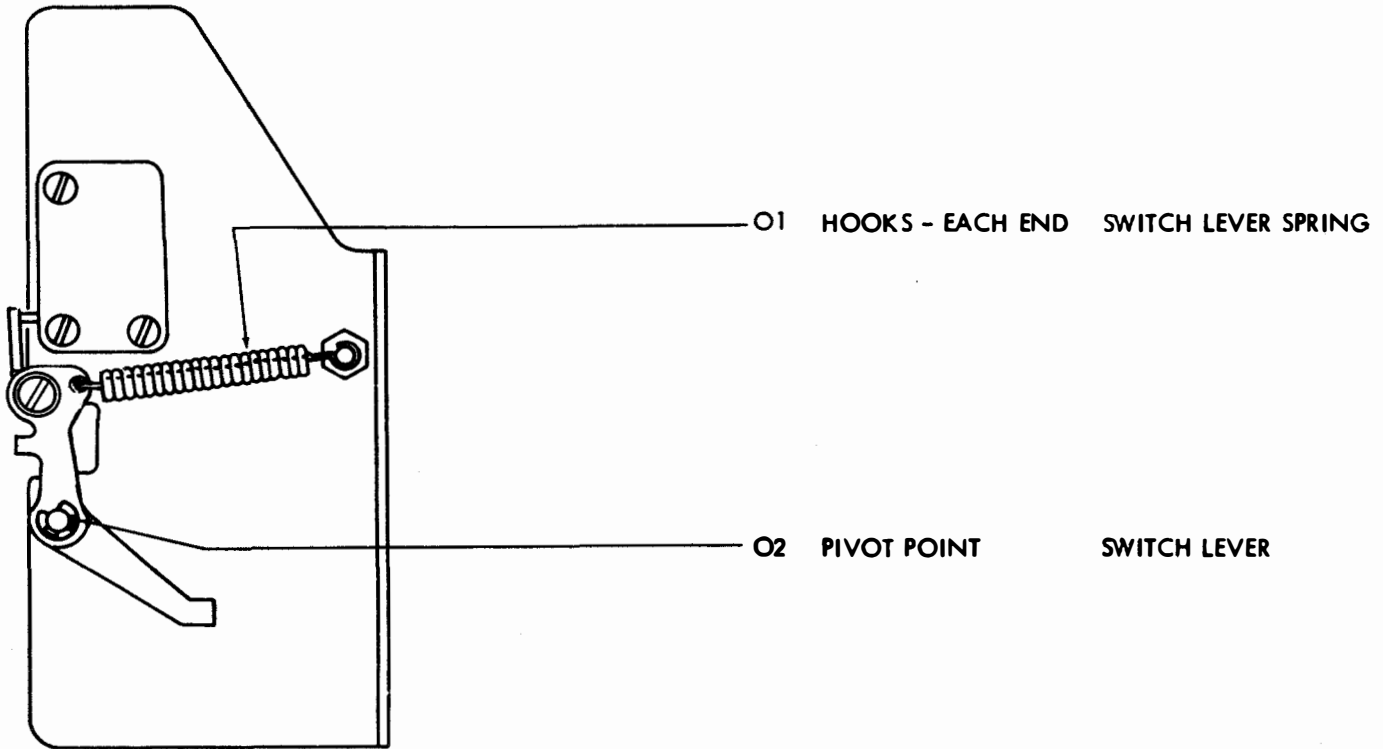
Switch Lever and Spring on Remote Non-Interfering BLANK Tape Feed-Out Mechanism, Early Design
